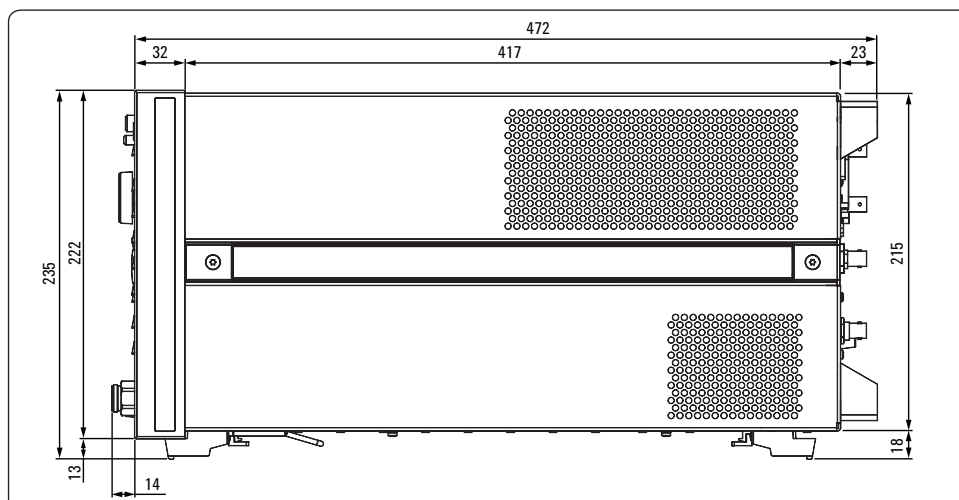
Dimensions (side view, E5071C with Option 2D5/2K5/4D5/4K5, in millimeters)
